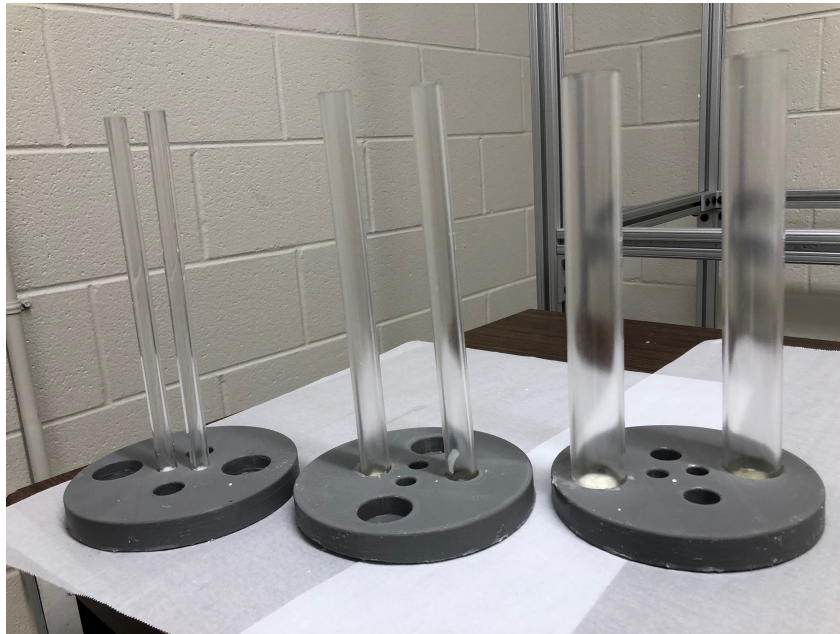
3D printed bases originally used to hold each of the acrylic tube molds.
